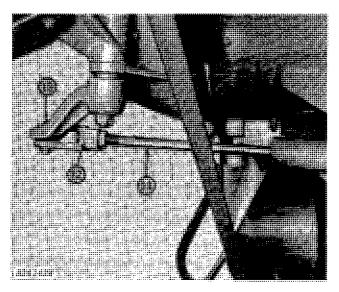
Connecting Piston Rod Yoke to Hinge Pin Arm
